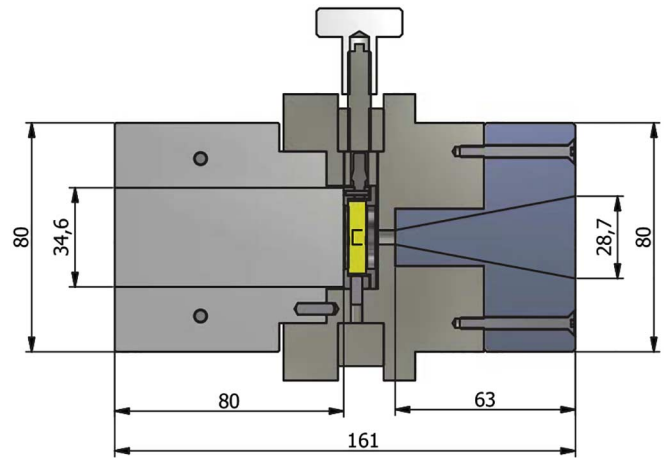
Design of the collimator used to create the fan beam having a width of 0.5 mm (all dimensions in mm).
